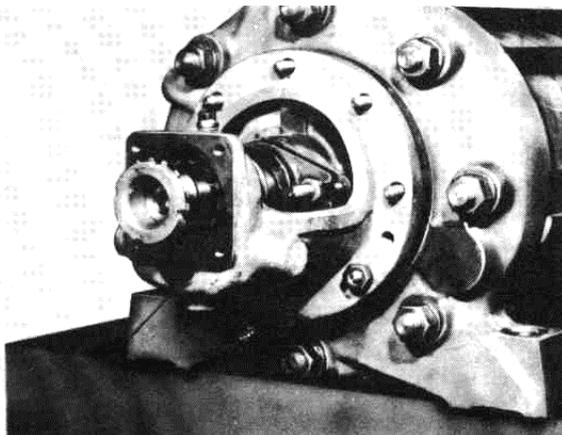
Dismantled inner components of cylindrical roller bearing
